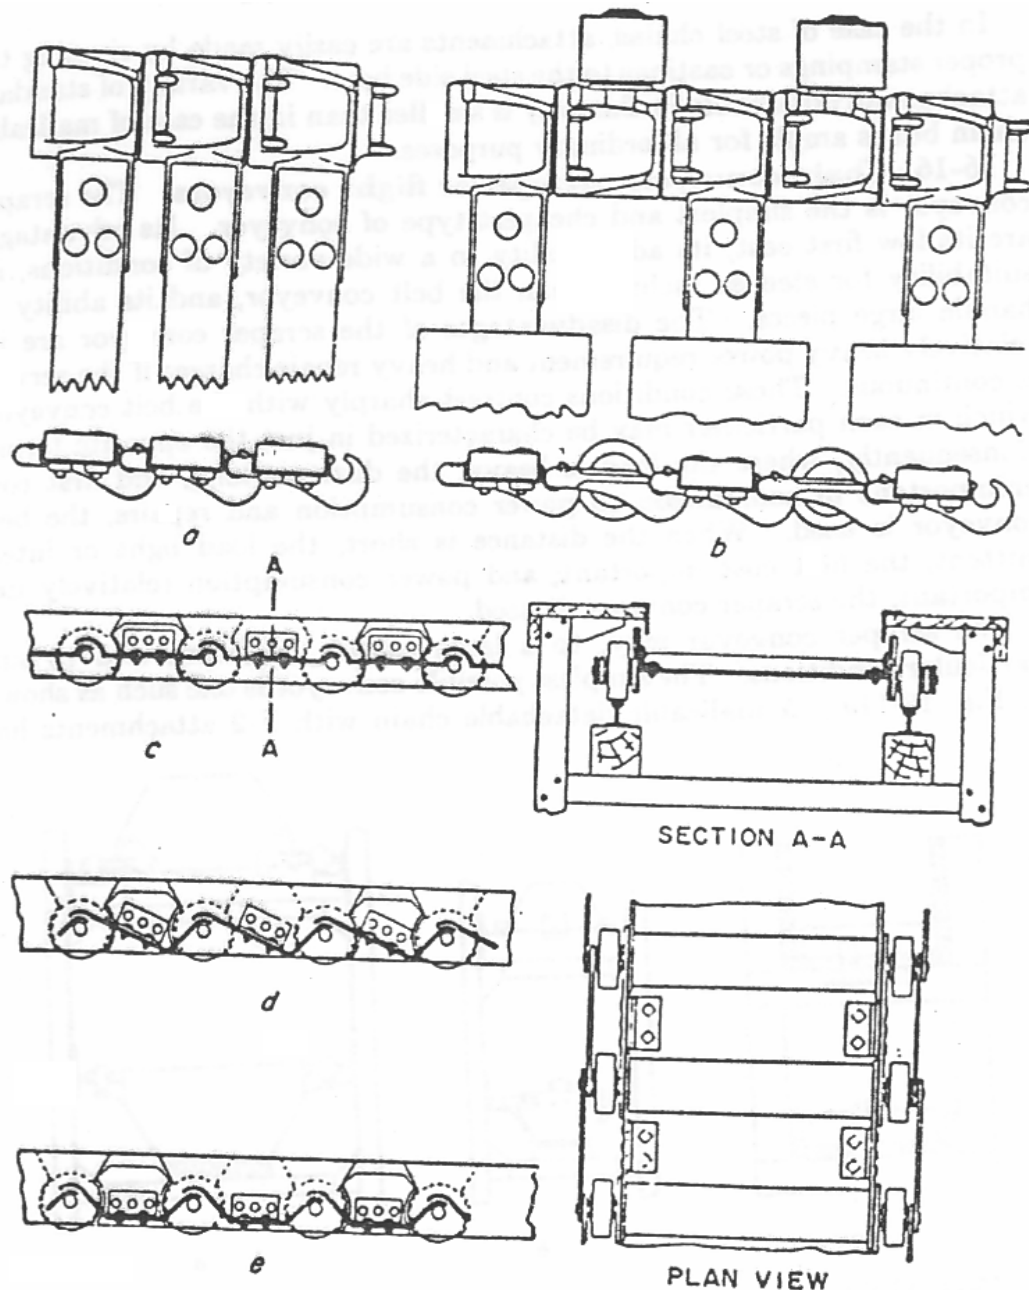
Apron conveyors: (a) malleable detachable chain with A attachments, chain dragging; (b) malleable detachable chain with alternate A and D attachments, chain on rollers; (c) overlapping flat steel plates riveted to long-pitch straight-side roller chain; (d) overlapping stamped plates; (e) recessed plates.
